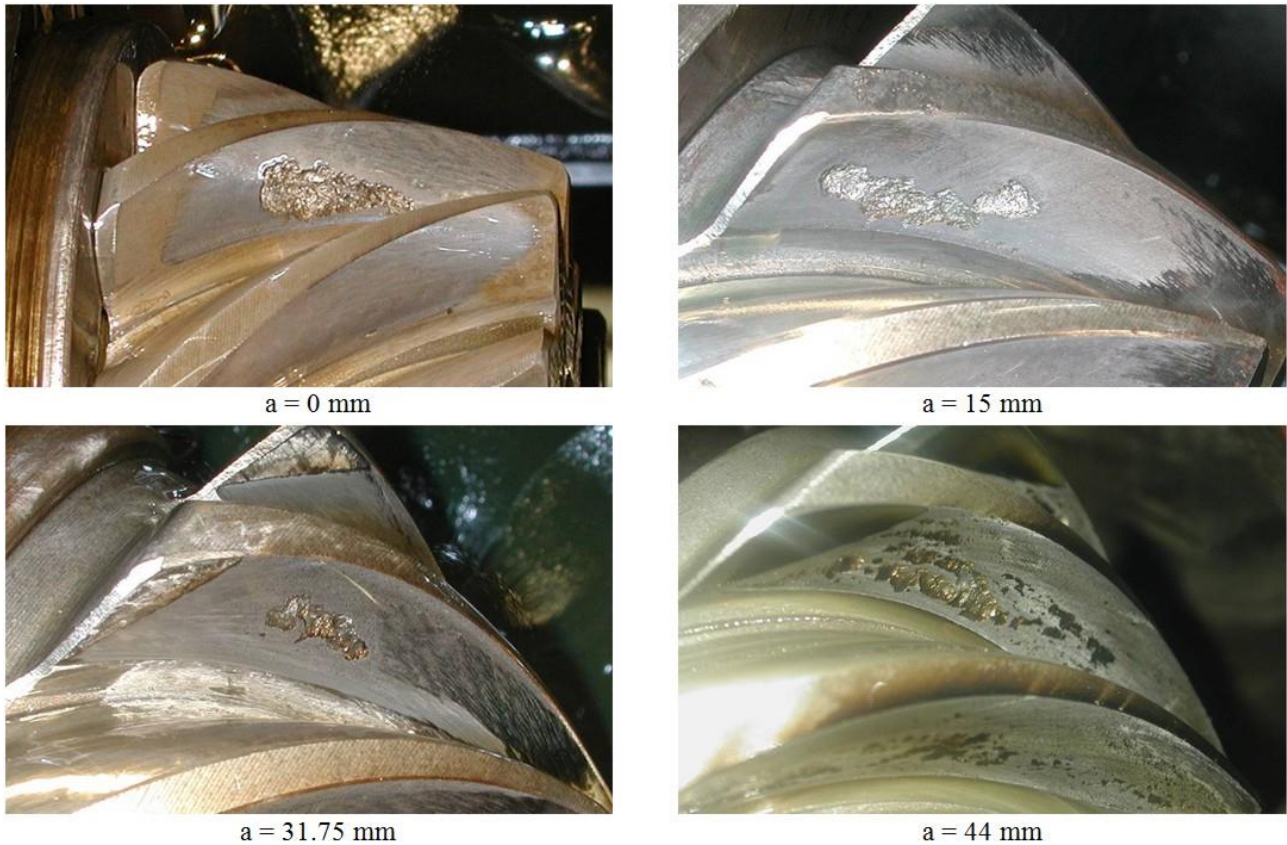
Typical pitting at the pinion flanks on the investigated test gears
